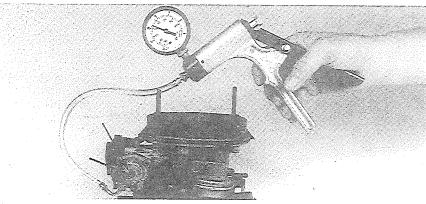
On this Holley/Chrysler carb, apply a vacuum to the pull-off and then turn the set screw (arrow) until the specified-size drill fits between the top of the choke blade and the air horn wall.
